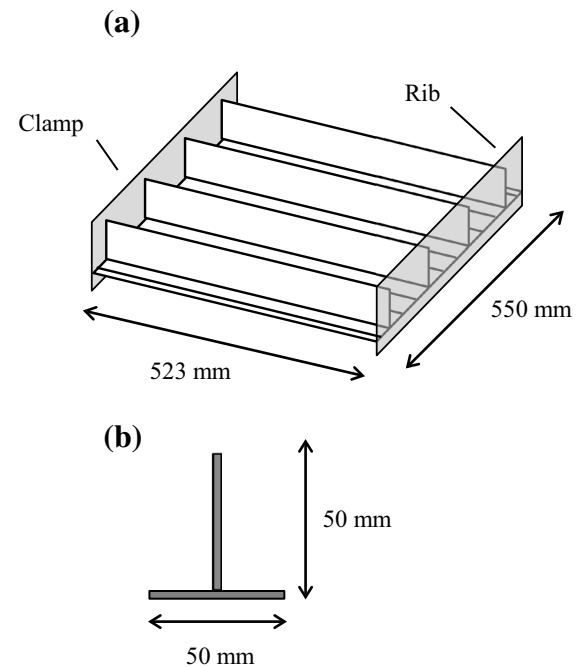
Geometry of a stiffened panel and b T-beam stiffener cross-section
